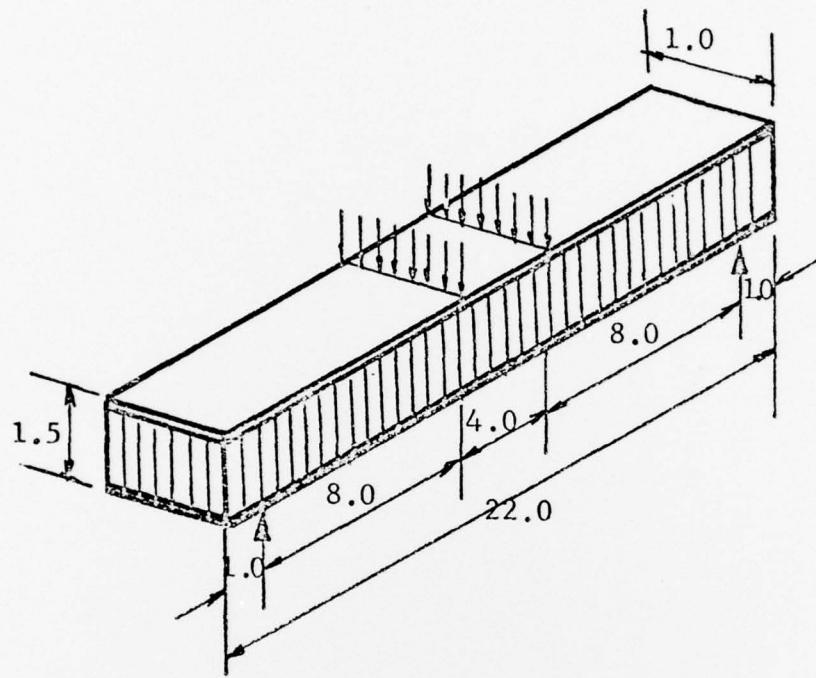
FOUR-POINT SANDWICH BEAM COMPRESSION SPECIMEN
